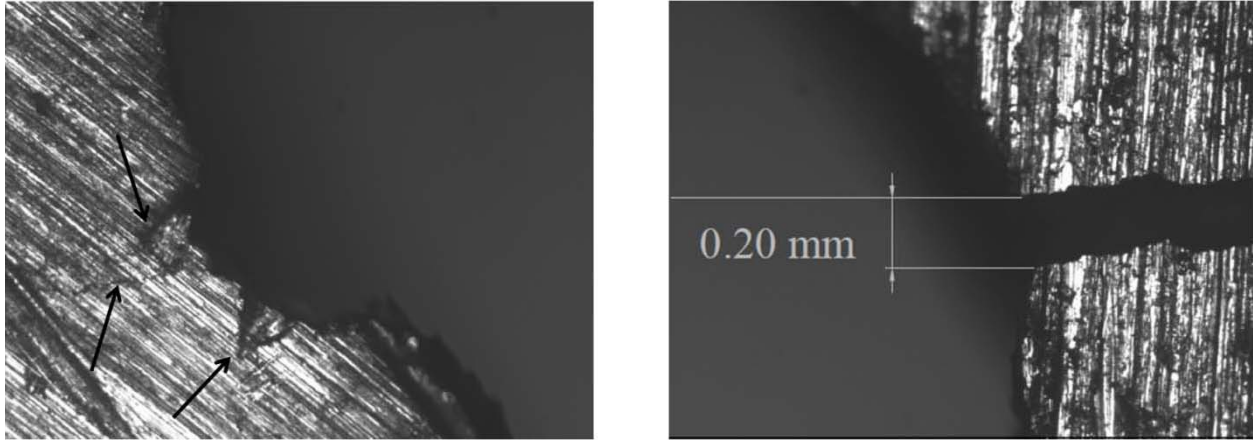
Cracks initiated and propagated at the weld toe (cracked specimens)
